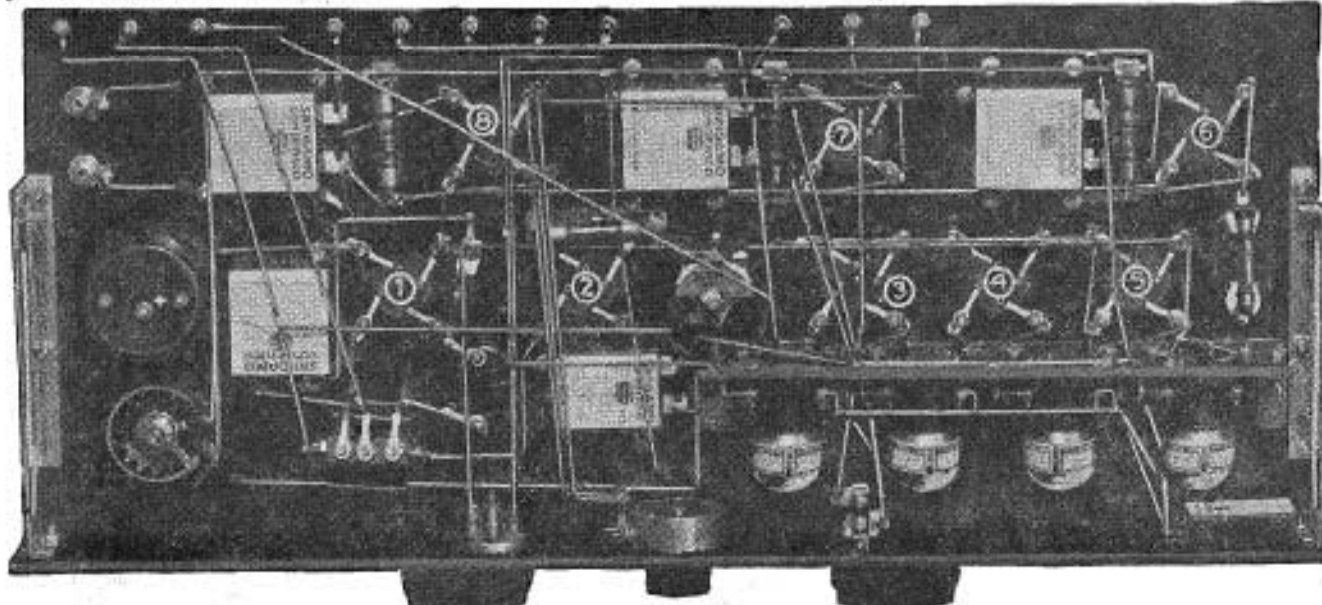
Bottom View of Completed Receiver Showing Wiring and Numbered Sockets
